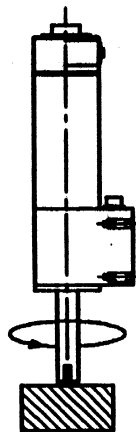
Rotating Probe T (transversal) with the probe element mounted on its front end side for testing of flat surfaces.
